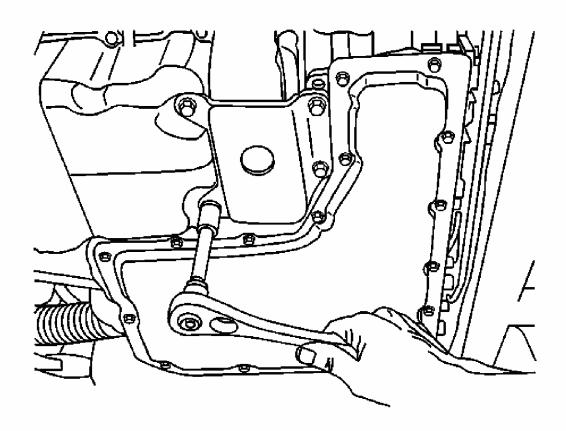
View Of Brace Between The Engine Oil Pan And The Transaxle Case Courtesy of GENERAL MOTORS CORP.
